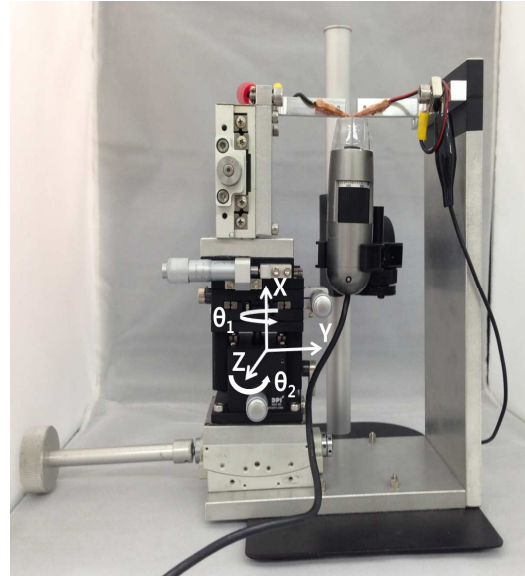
5 axis device to fabricate the butt-welded TC
